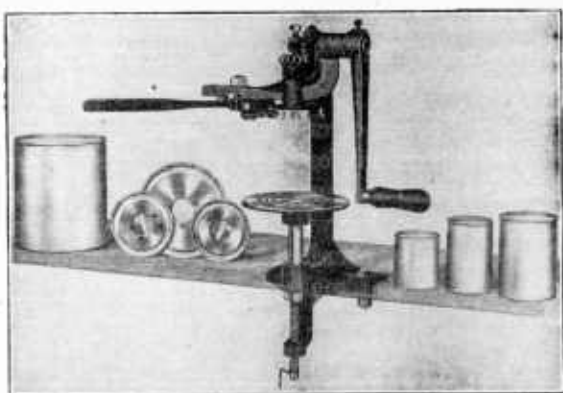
Mechanical sealing machine used for three sizes of cans.
